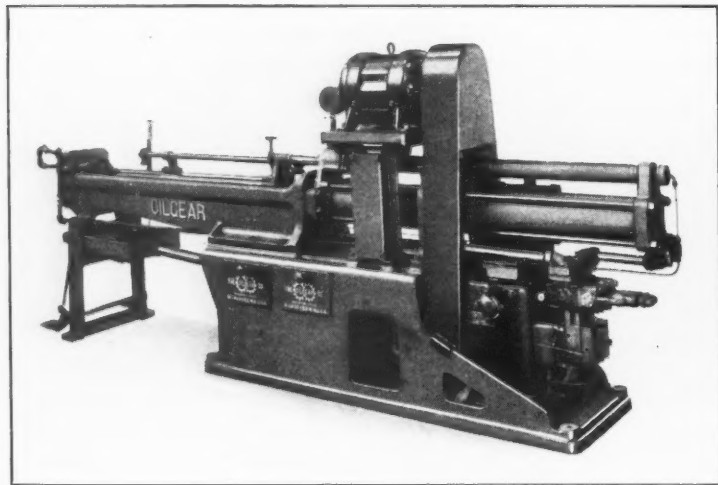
Oilgear High-speed Broaching Machine Embodiment of Various Improved Features
